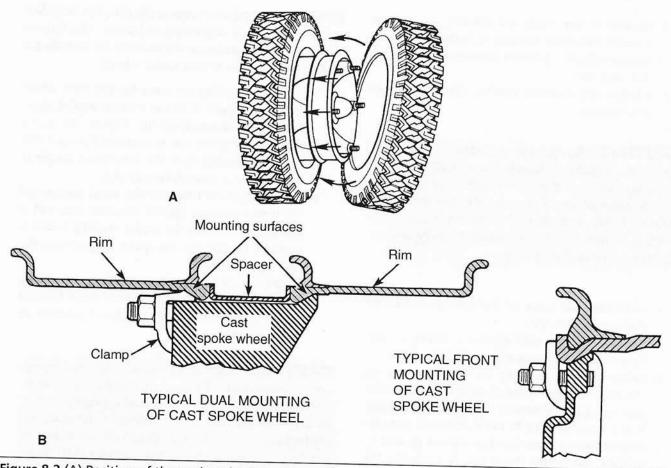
(A) Position of the spoke wheel dual mounting spacer band, and (B) cross-section view of mounted dual wheels. (Courtesy of Navistar International Corp.)
